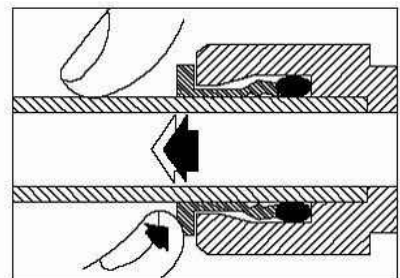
When removing the hose, complete the task by pressing the collette.
